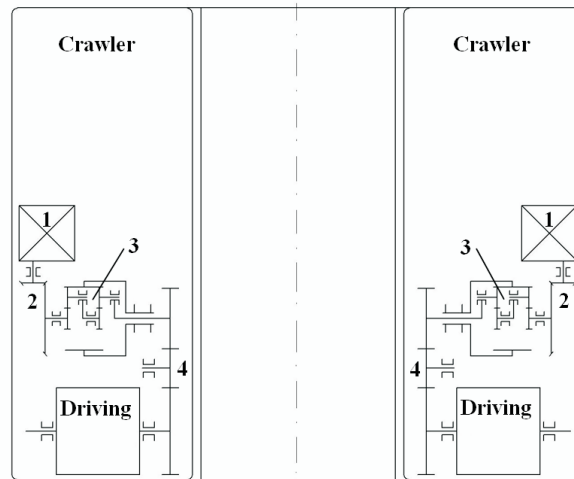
Transmission: 1 – motor, 2 – bevel gear, 3 – planetary gear, 4 – reduction gear
